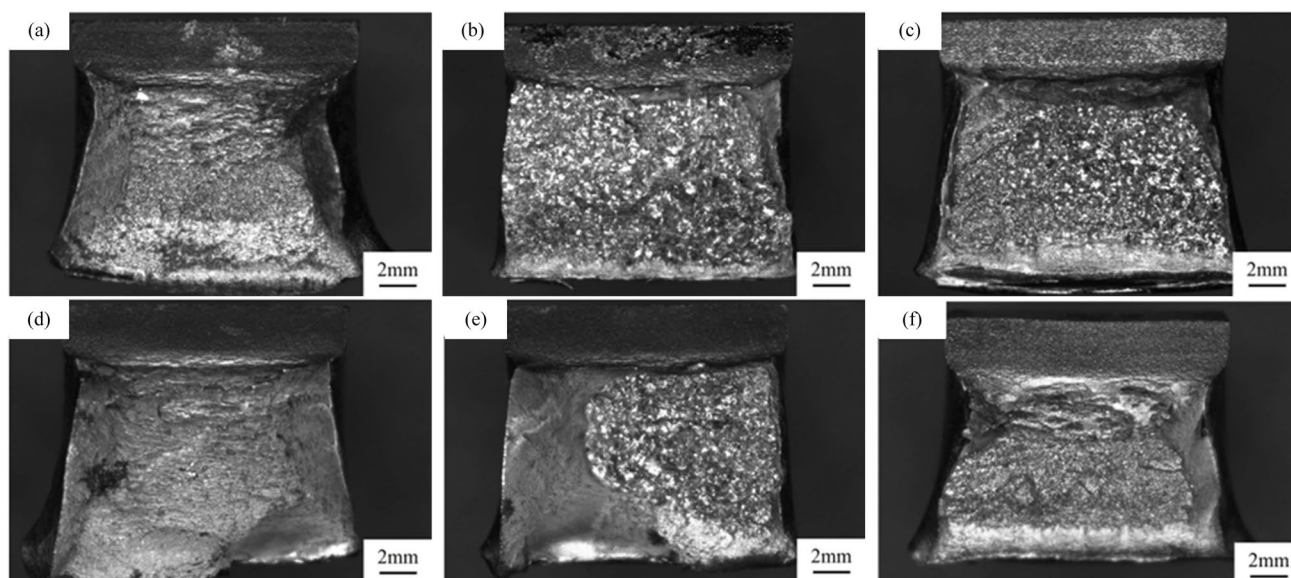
Fracture surface of welded joints of 12MnNiVR steel: (a) the center of weld metal of TFS, (b) fusion line of TFS, (c) fusion line +2 mm of TFS, (d) the center of weld metal of TCS, (e) fusion line of TCS, (f) fusion line +2 mm of TCS
